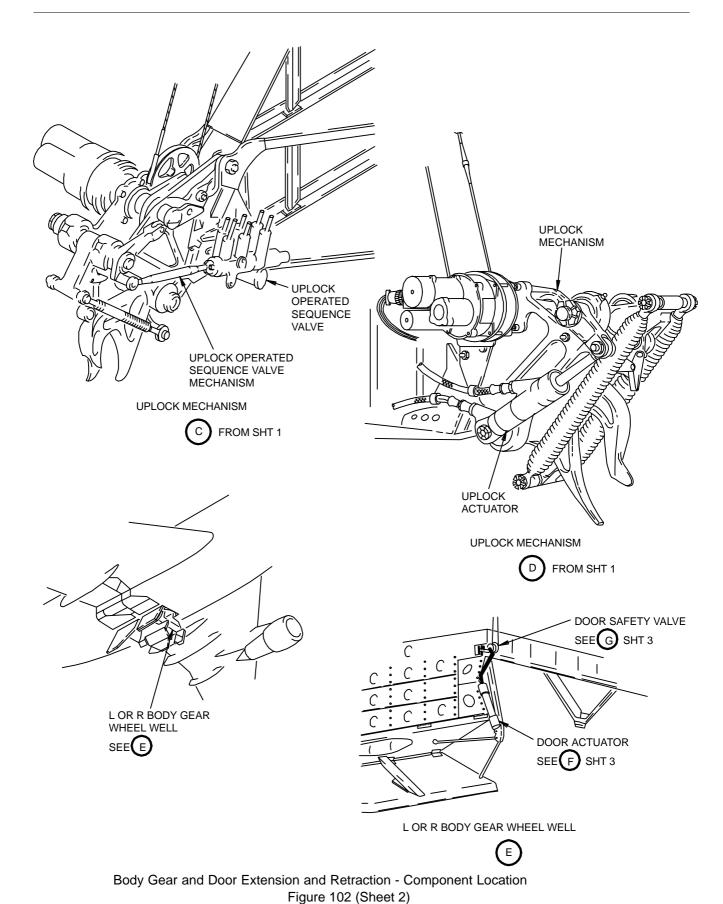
32-33 Body Gear and Door Ext./Ret. Comp. Location Fig. 102 (Sheet 2)
